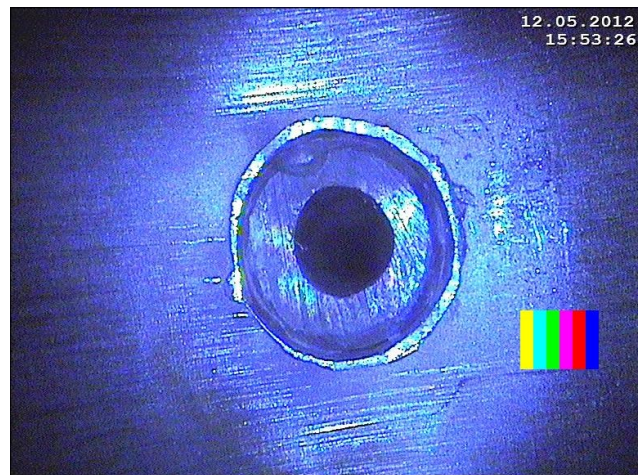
View with the endoscope of the capillary weld inside the warm up pipe.
